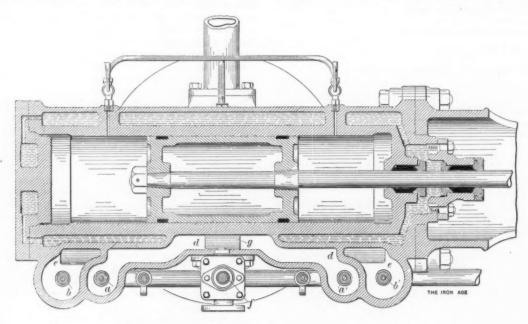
Horizontal Section of the Cylinder and Valve Chests.
